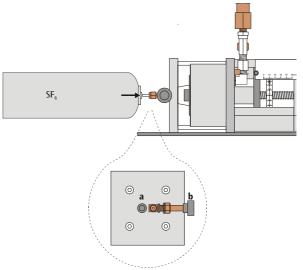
Filling with test gas from a MINICAN® gas container (a) flush valve, (b) regulating valve
